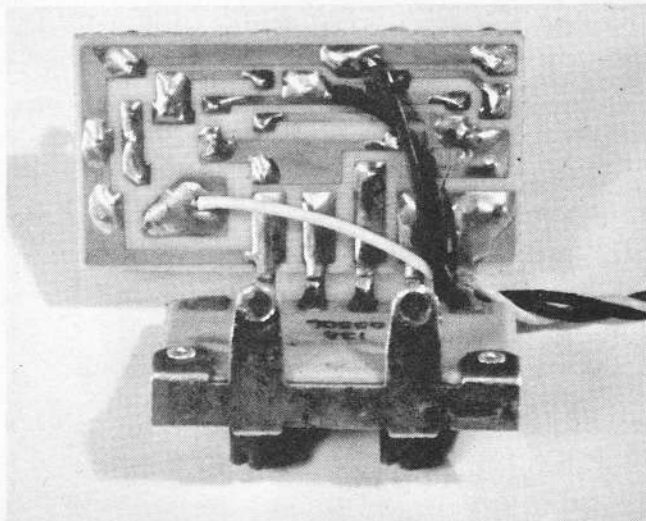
Bottom of the printed circuit board shows circuit lands, also hook-up wires. Note shiny solder joints, indication of a good job.
